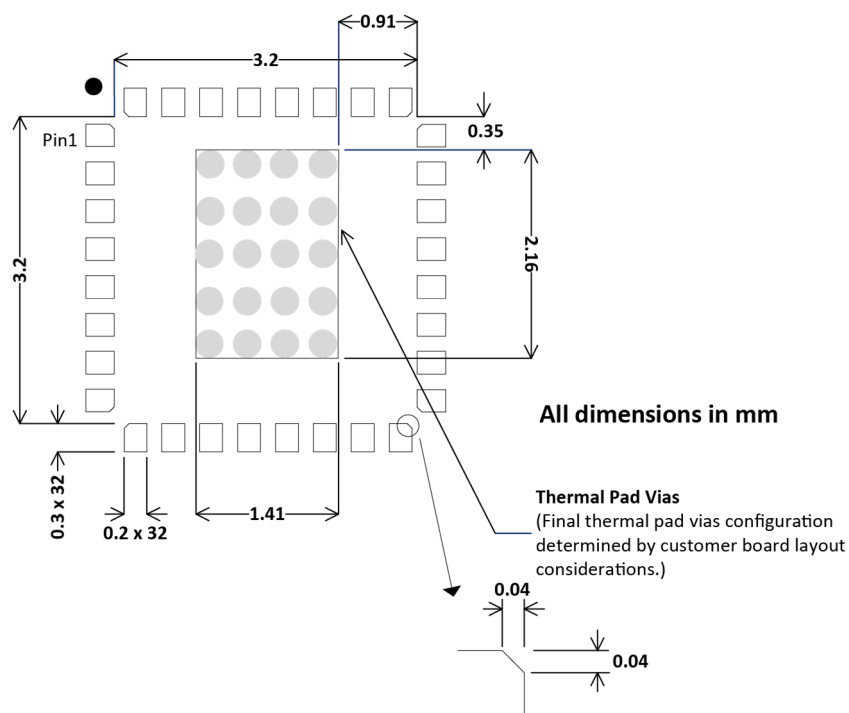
Recommended PCB Footprint for ARC3C08485 32P QFN
